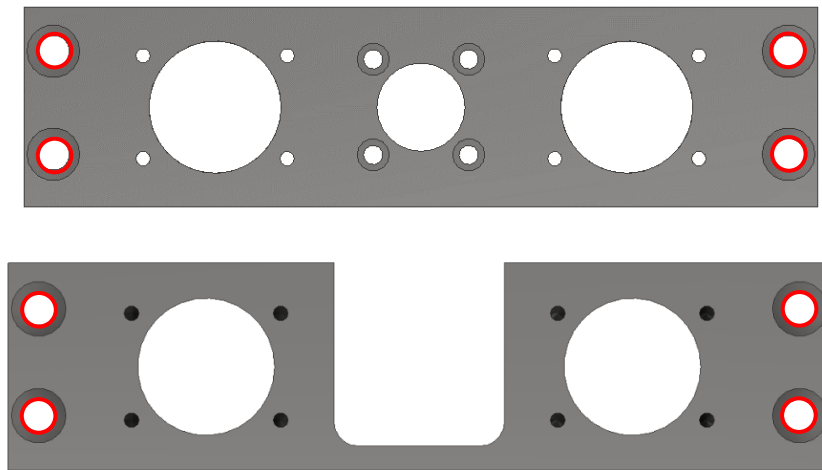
Frontal and rear cylindrical bearings supporting plates with highlighted in red the bolts holes used as FEM constraints.
